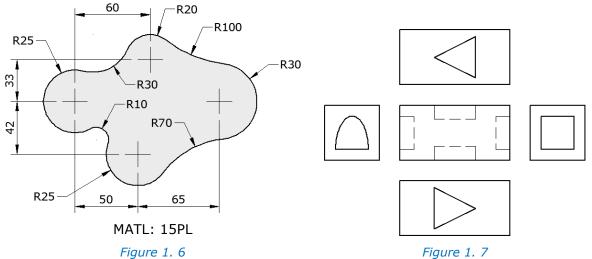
7 shows a simple hypothetical block with a series of different shape holes; however, 5-views are required to fully describe the shape.
